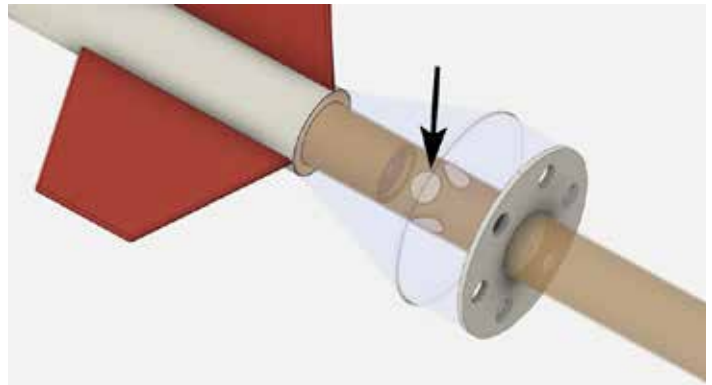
Vent holes in the front of the engine mount tube are located just aft of the nozzle of the upper stage.
